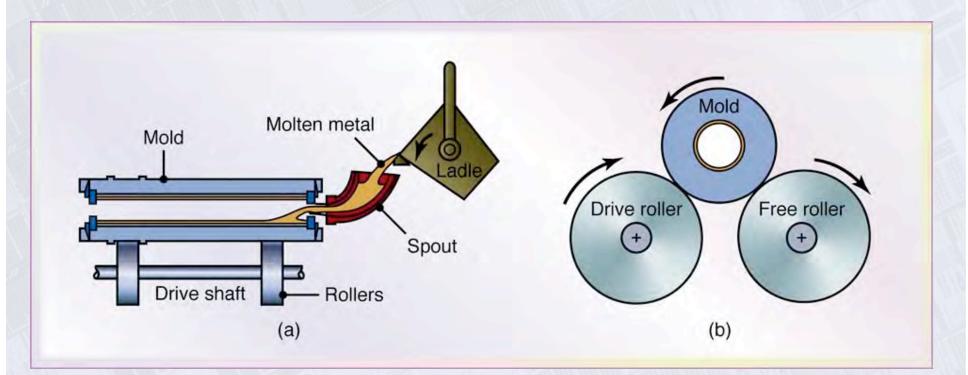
(a) Schematic illustration of the centrifugal-casting process. Pipes, cylinder liners, and similarly shaped parts can be cast with this process. (b) Side view of the machine.
